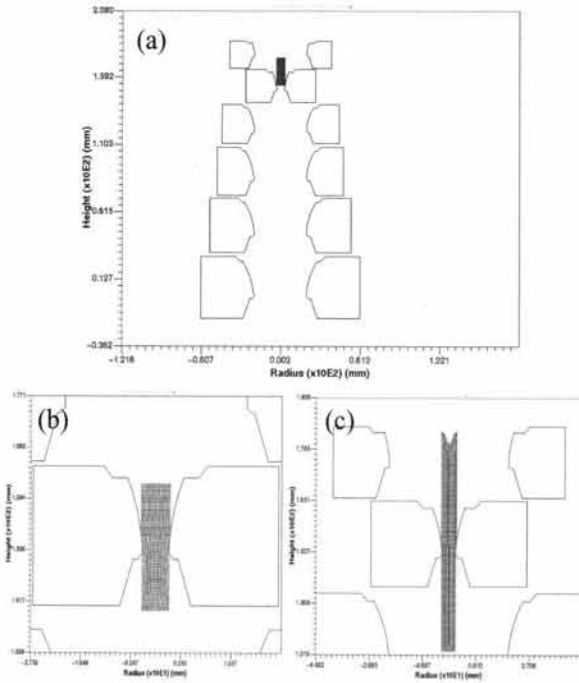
The finite element analysis of drawing. (a) 6 pass drawing dies line, (b) 1st pass drawing (4.5 mm→4.0 mm), (c) 6th pass drawing (3.0 mm→2.6 mm).
